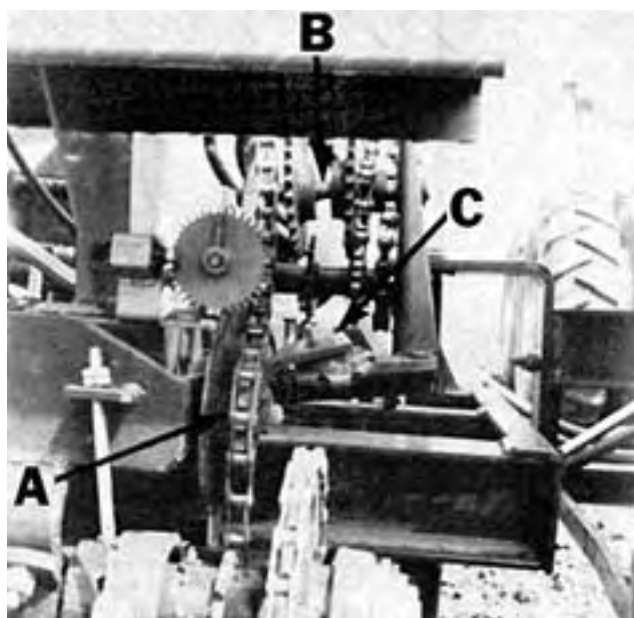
Drive Failure Caused by Feed Cup Shaft Bearing Seizure: (A) Broken Secondary Drive Chain, (B) Bent and Twisted Jackshaft, (C) Bent Idler Bracket.
